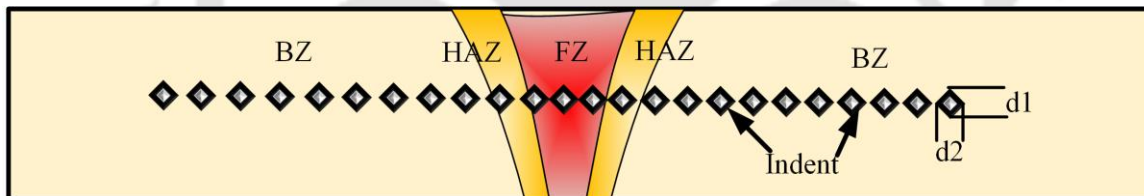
Schematic view of the micro hardness measurement of a welded sample
